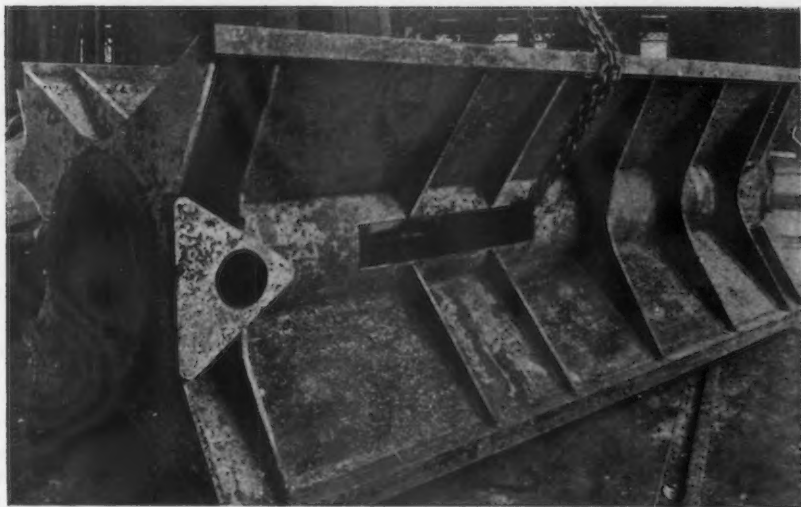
This lifting ram for a 15-ton soaking pit crane is made of 1-in. plates gas cut and arc welded. It has been in continuous operation for more than a year.
